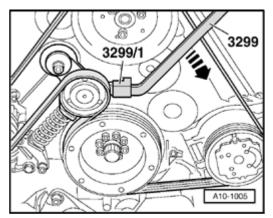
Swinging Ribbed Belt Tensioner To Release Tension On Ribbed Belt Using 3299 Ribbed Belt Installation Tool And 3299/1 Claw For Tensioner
